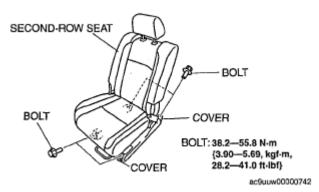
Identifying Second-Row Seat, Bolt With Cover & Torque Specifications Courtesy of MAZDA MOTORS CORP.
